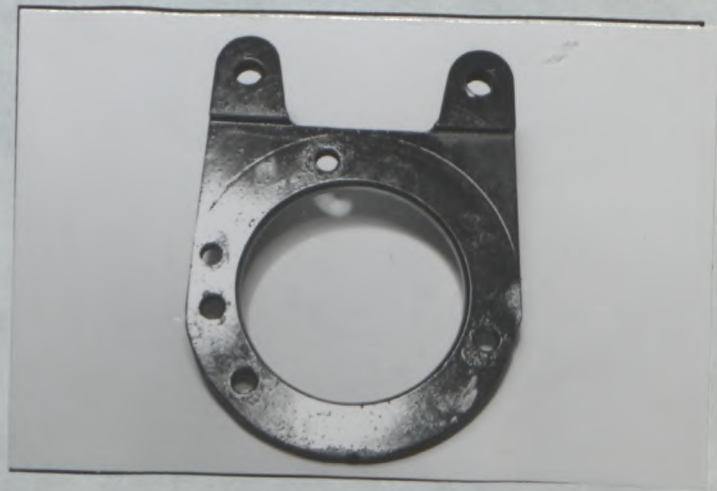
BRAKE CALIPER MOUNT TYPE 1
